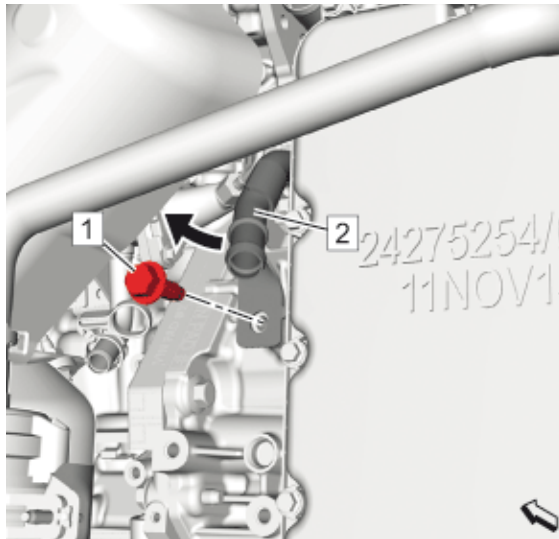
Heater Water Shutoff Valve Inlet Hose And Bolt
